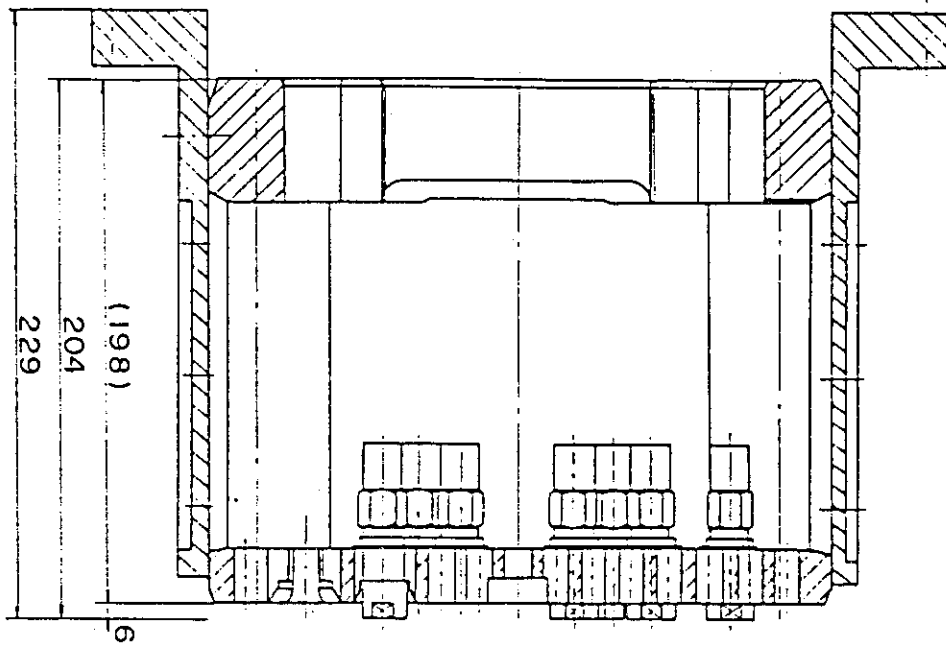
Arrangement and Principal Dimension of End Boxes and Top Grid Spacers
